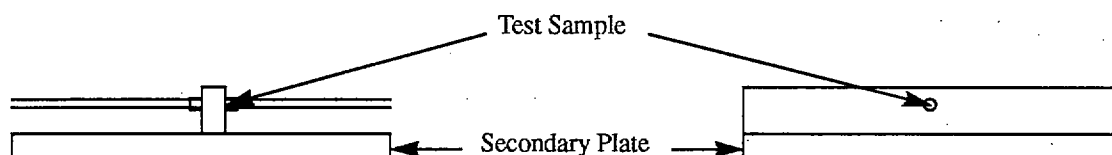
PANEL MOUNT CONNECTOR FIXTURE
